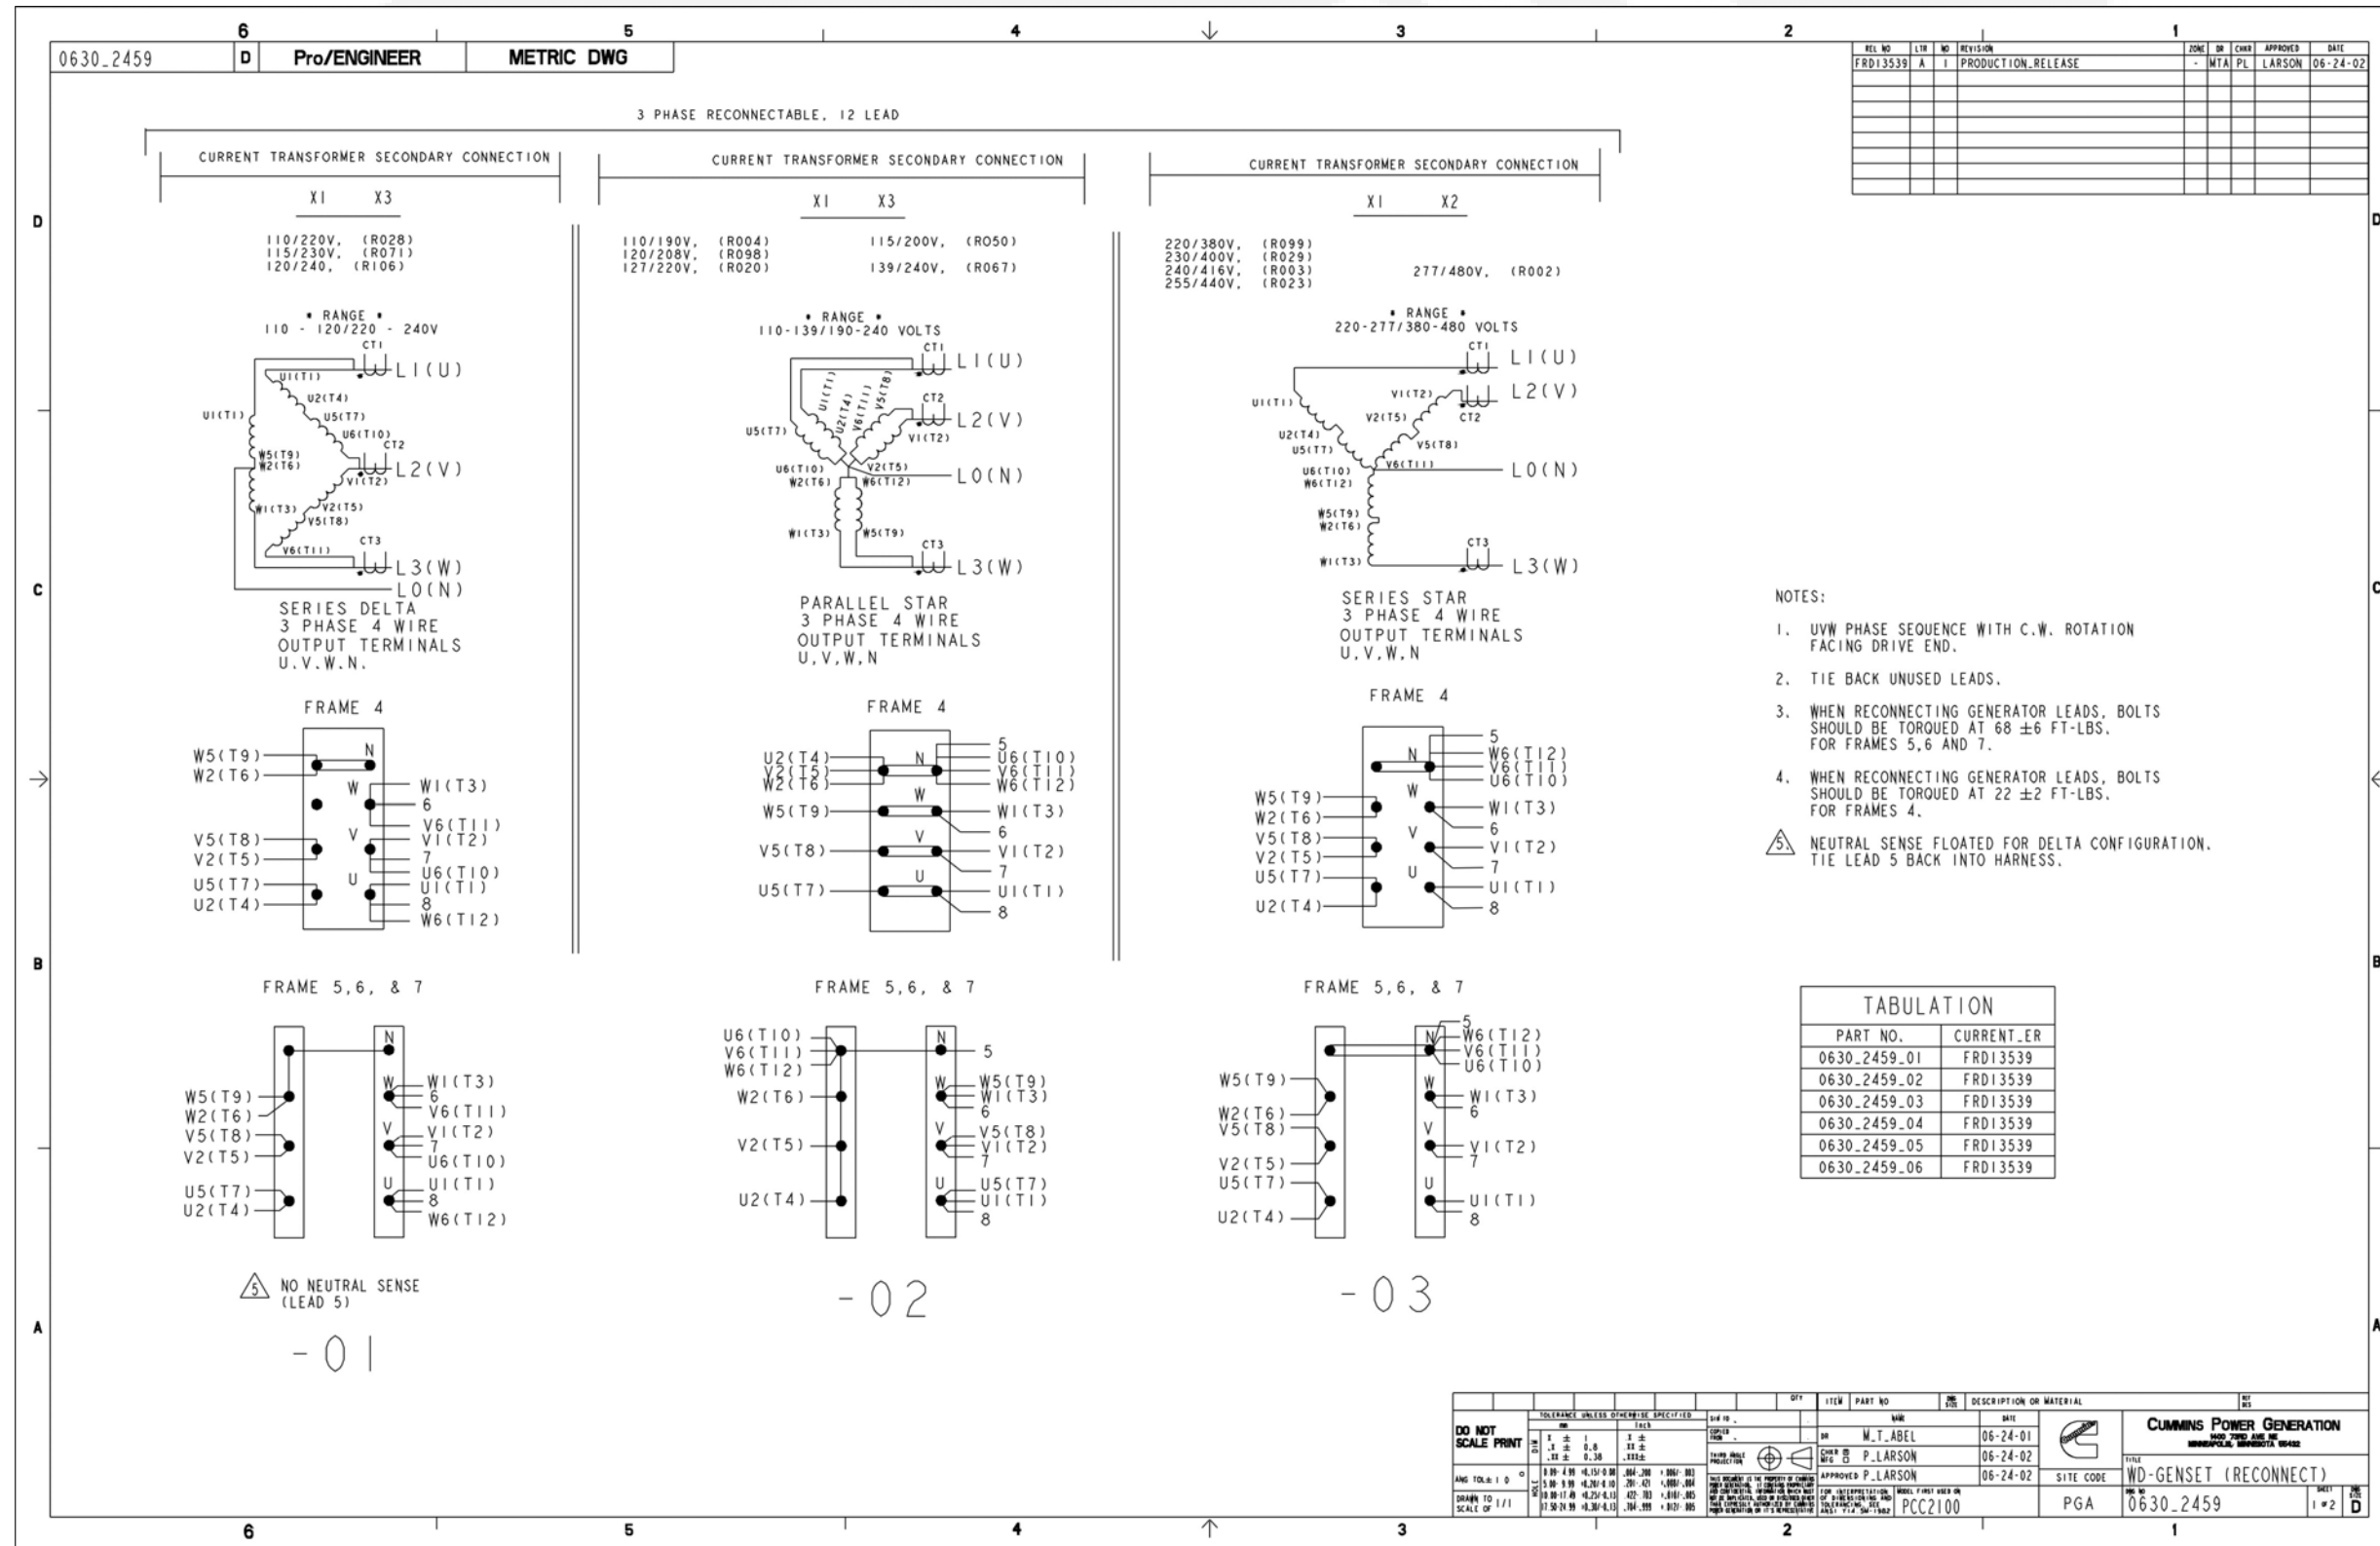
ALTERNATOR RECONNECT DRAWING (SHEET 1)
